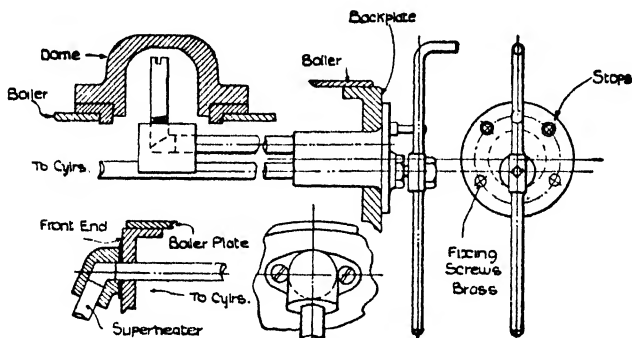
Method of fitting-up Regulator (Fig. 305).
